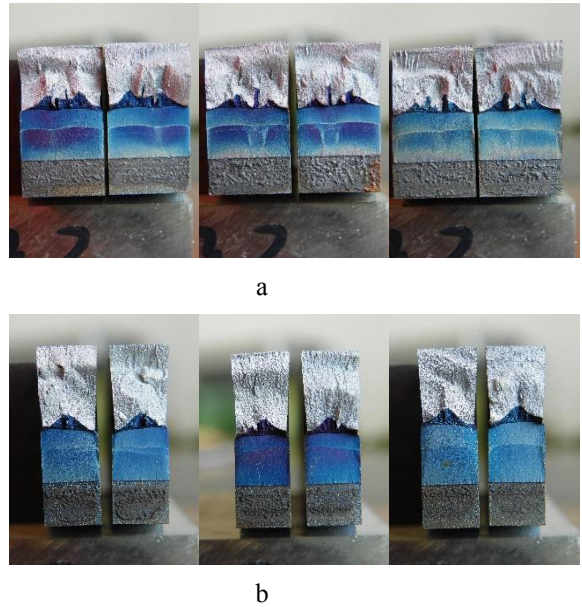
Fracture surface of the specimens: a - $B = 12.5$ mm; b - $B = 7$ mm
